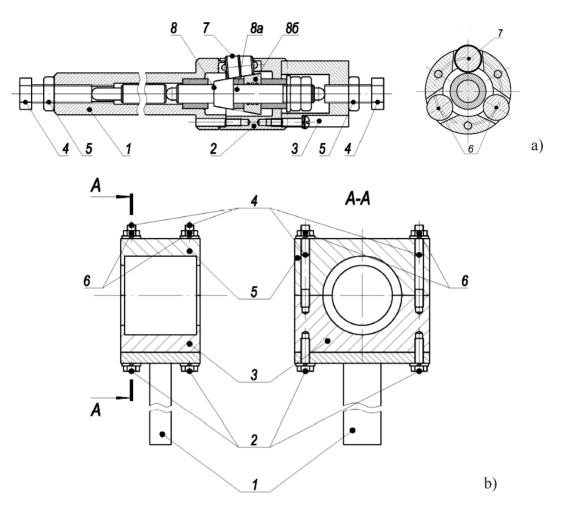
Scheme of developed experimental equipment: a) burnisher: 1 - body; 2 - cage; 3 - hold-down tool; 4 - setting screw; 5 - lock nuts; 6 - smooth rollers; 7 - deforming rollers; 8 - abut; 8a - the abut part that active about body; 8b - the part that active about part 8a; b) container: 1 - tail piece; 2 - fastening bolt; 3 - hold-down tool; 4 - double-end bolt; 5 - abut; 6 - draw nut.
